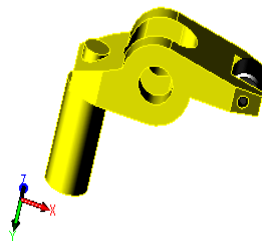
48 Three Dimensional Sketch of Rocker Arm
